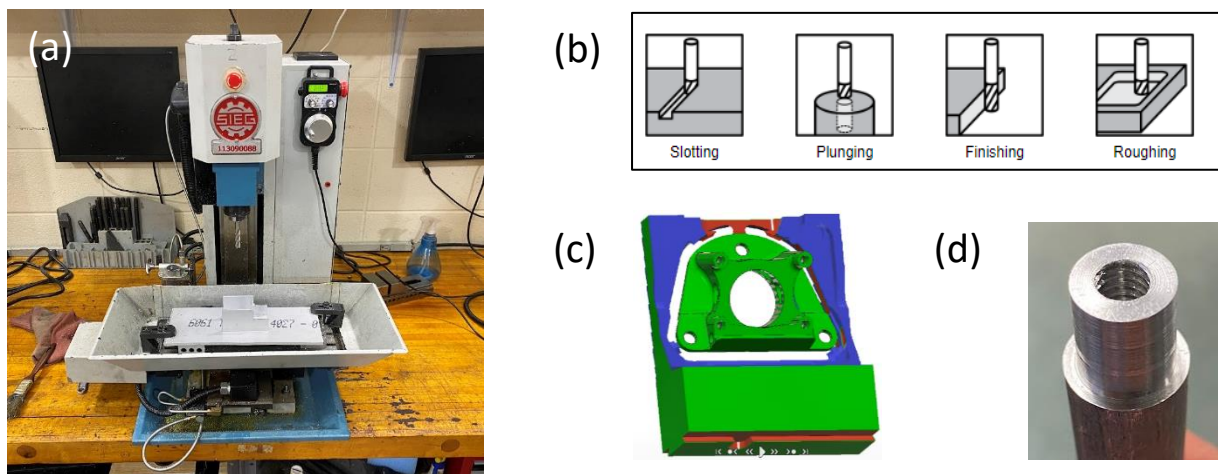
(a) Example of a 3-axis CNC desktop router in the \$3,000-\$5,000 range which would be suitable for a supplementary machining lab, (b) examples of operations that could be required to be incorporated into the machined part, (c) an example of 3-axis work holding that might be developed by a student, and (d) manual drill and tap operation done manually and post-process.
